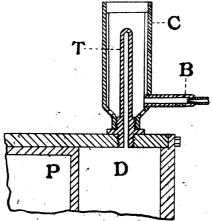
CROSS SECTION OF HOT TUBE IGNITOR.
